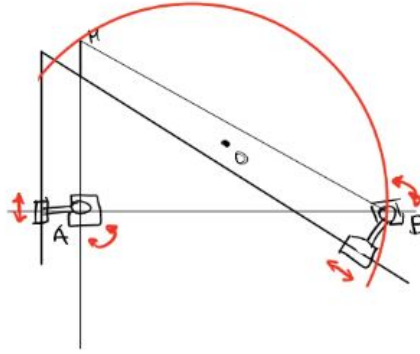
mechanical design of the L shape for RCM mechanism of concept 3
